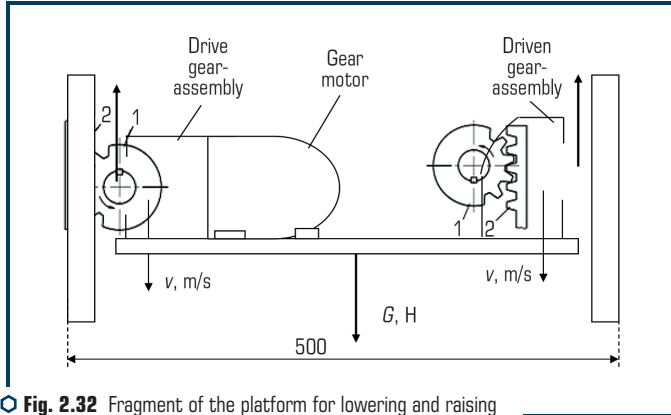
Fragment of the platform for lowering and raising the knife mechanism
